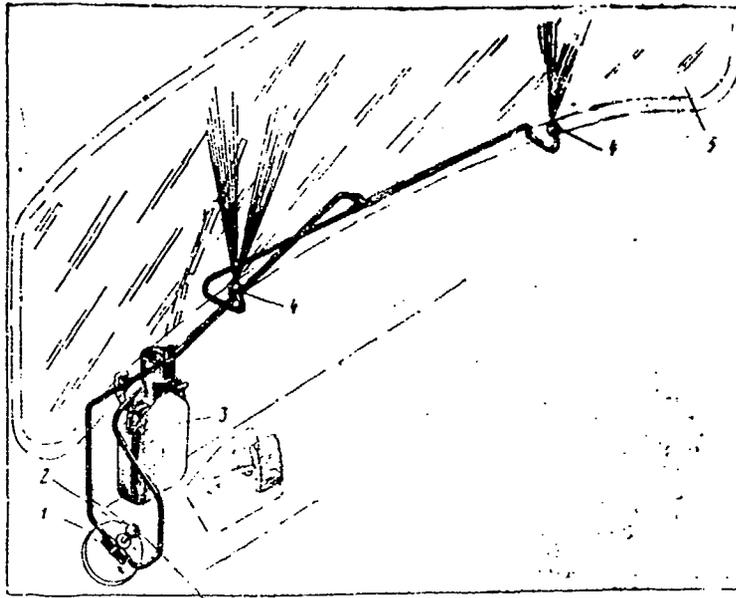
Windshield Washer for ZIL-130 and ZIL-131.
